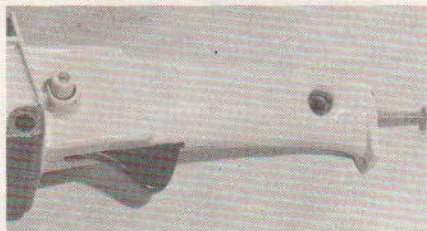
The nut (N-Fig. PR6-11) can be held in position with a screw while assembling.
